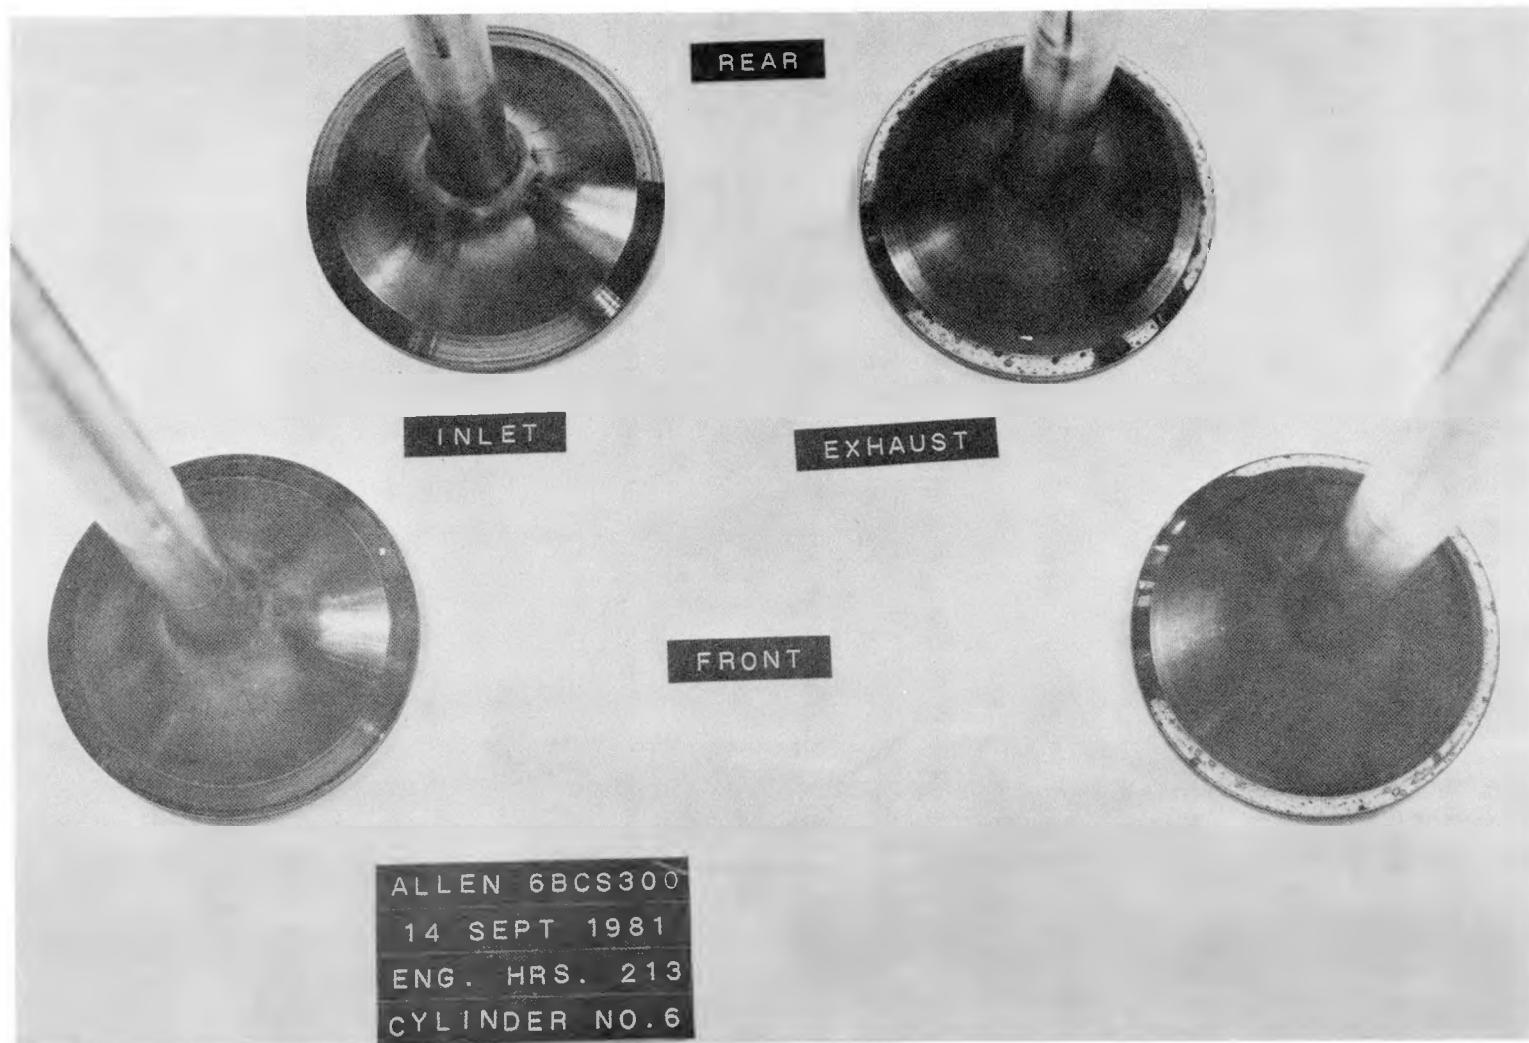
Valve Seat Face Conditions After Endurance Tests
